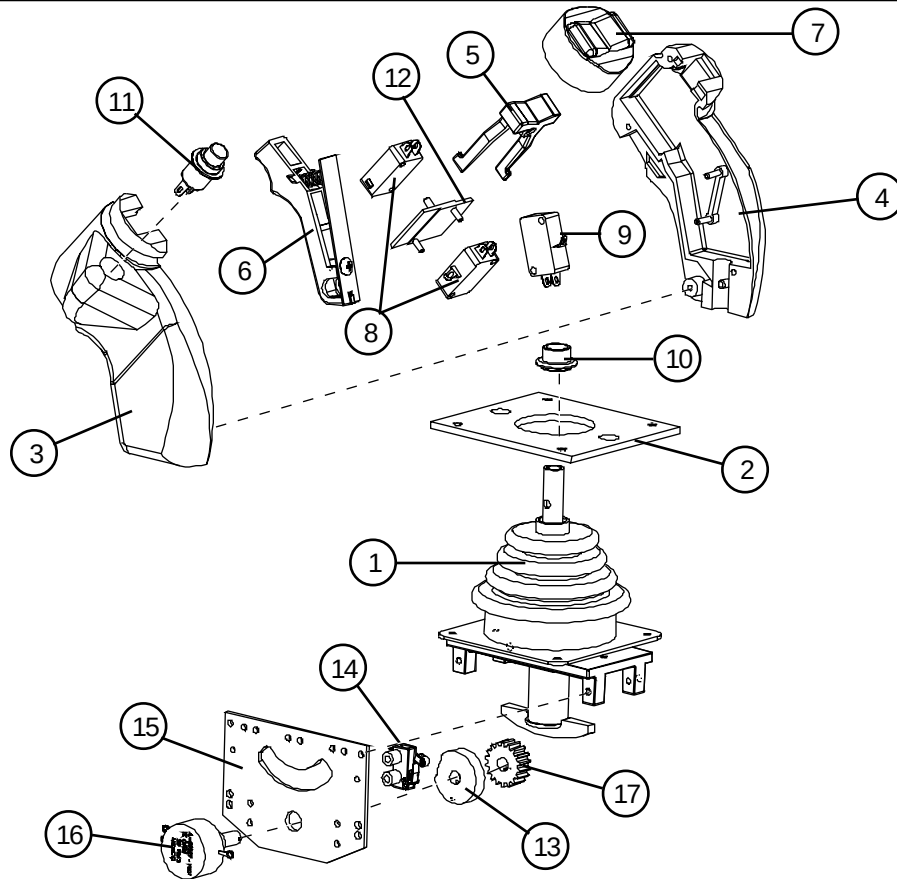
DRIVE/STEER CONTROLLER ASSEMBLY
